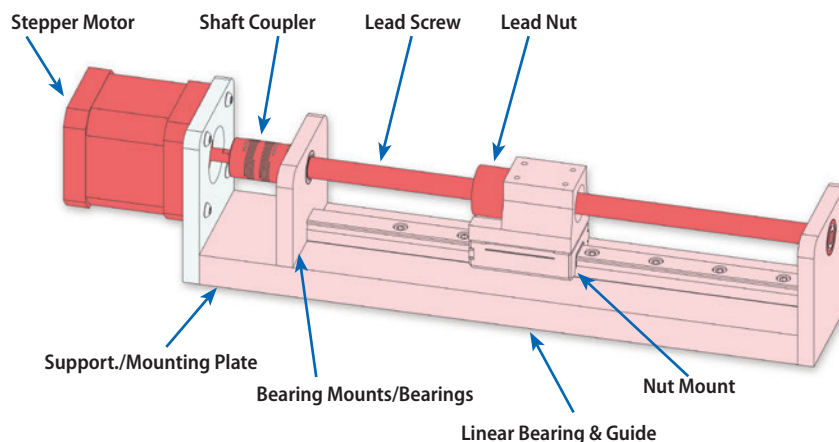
A traditional stepper motor and lead screw-based drive mechanism. Linear bearing and guide components not only provide guidance for the lead nut but also support the load attached to the lead nut. (All images courtesy of Thomson Industries, Inc.)
